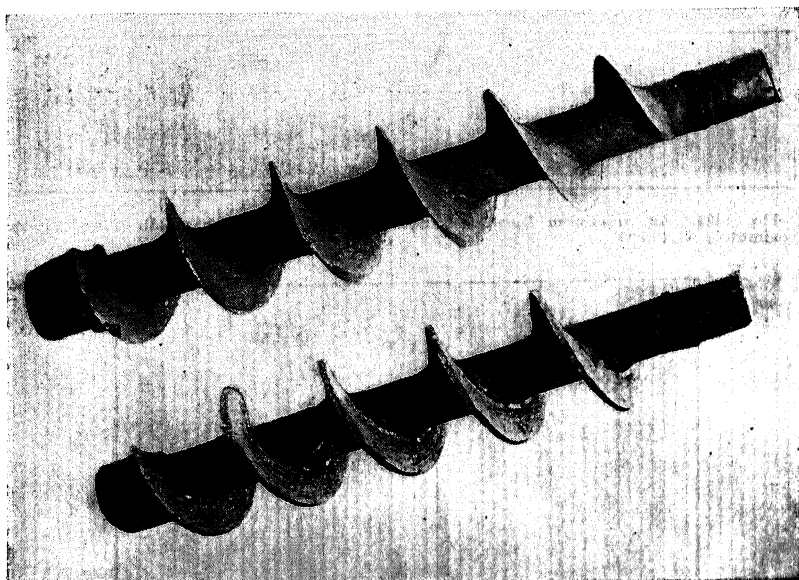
Reclamation of worn locomotive stoker screw flights. A metal strip is welded to the edge of the screw, then the face is hard-surfaced.
